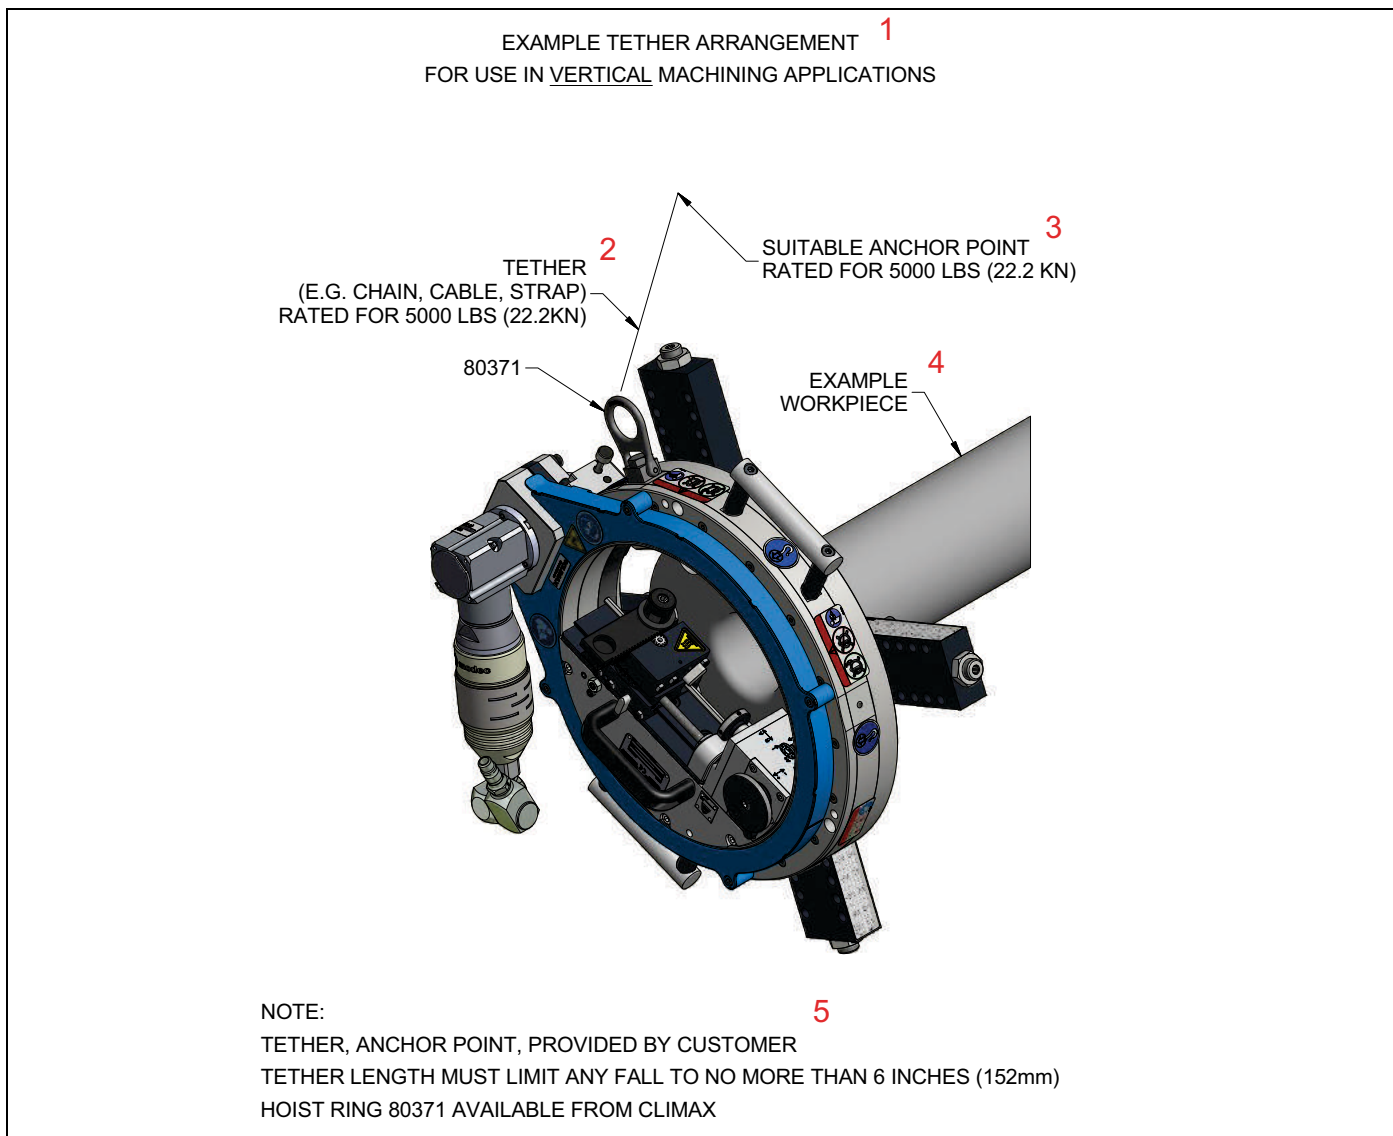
MOUNT THE MACHINE TO THE WORKPIECE (FF1200 SHOWN)
